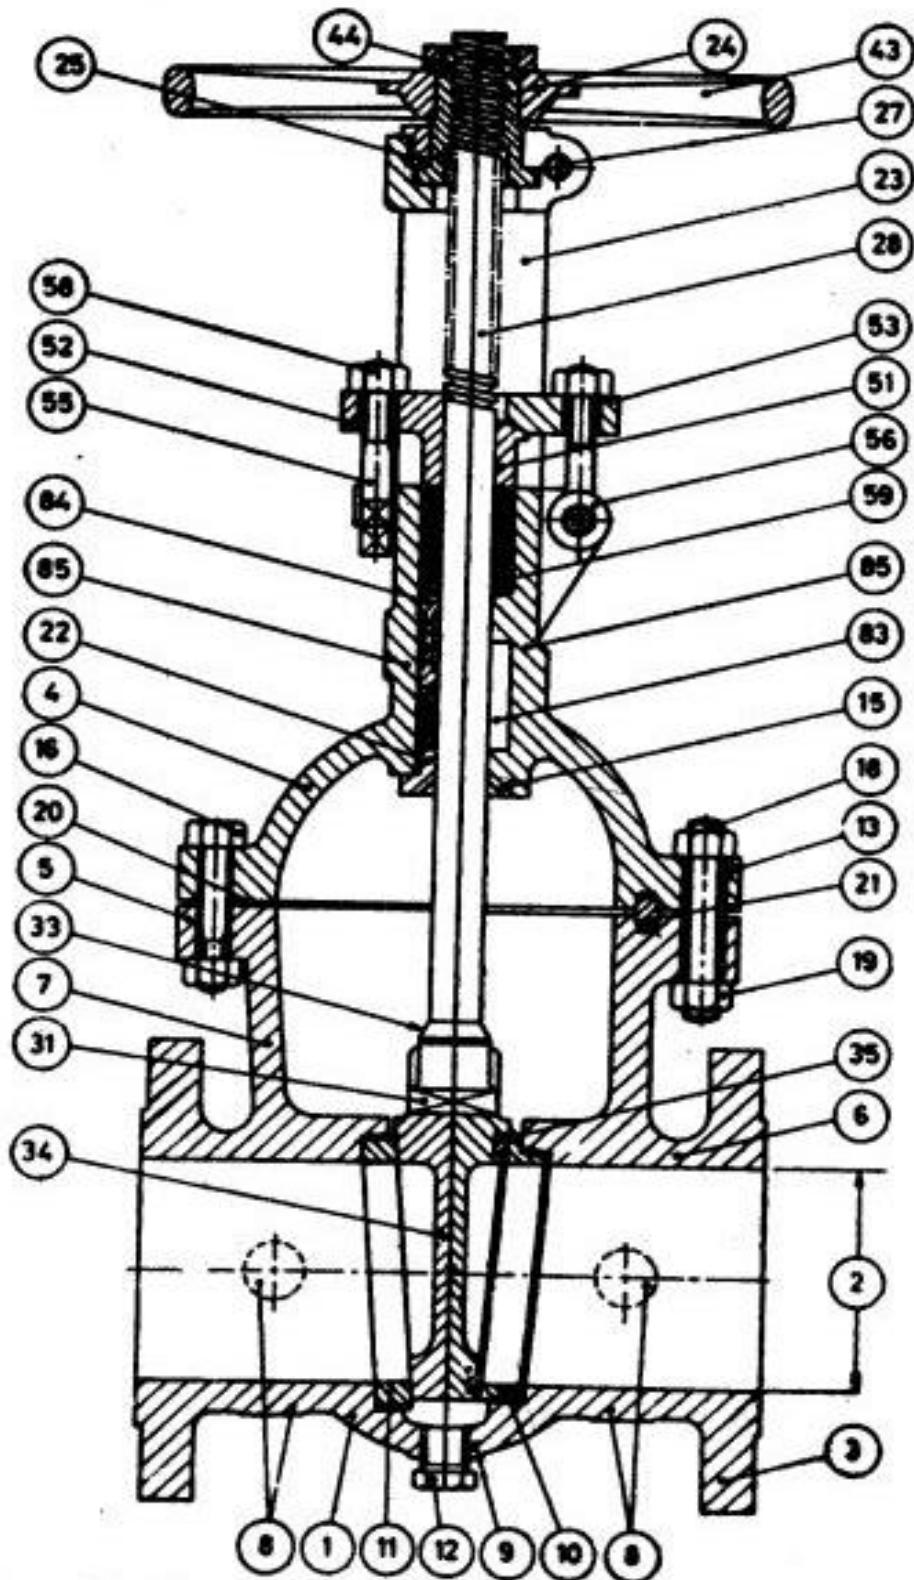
OUTSIDE SCREW, SOLID WEDGE, STEM RISING THROUGH HAND-WHEEL
